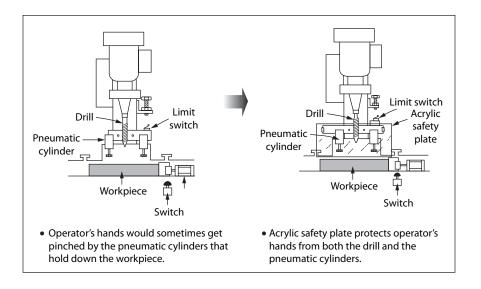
The Use of a Safety Plate for a Drilling Machine.
